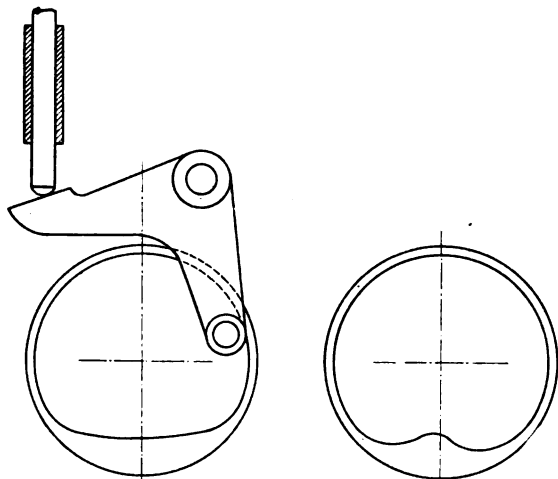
Exhaust cam and rocker of well-known motorcycle engine
